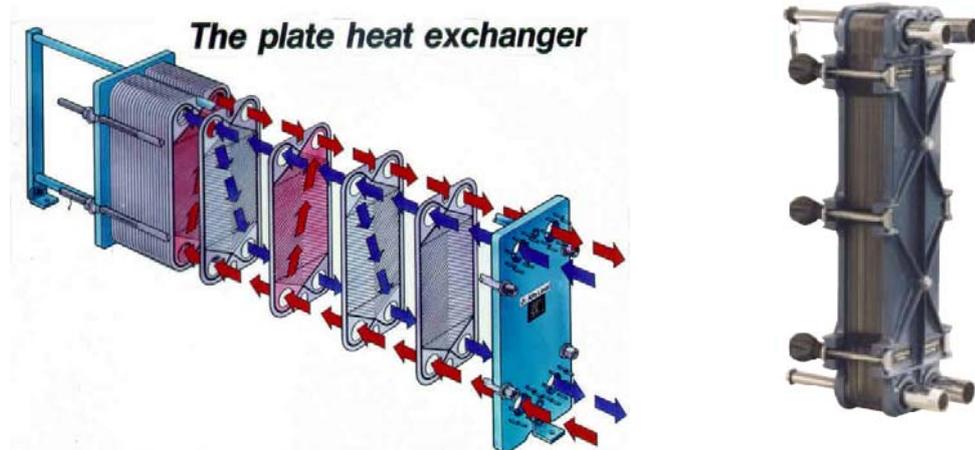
(LHS). An exploded view of a typical plate and frame heat exchanger design, and the assembled unit (RHS).
